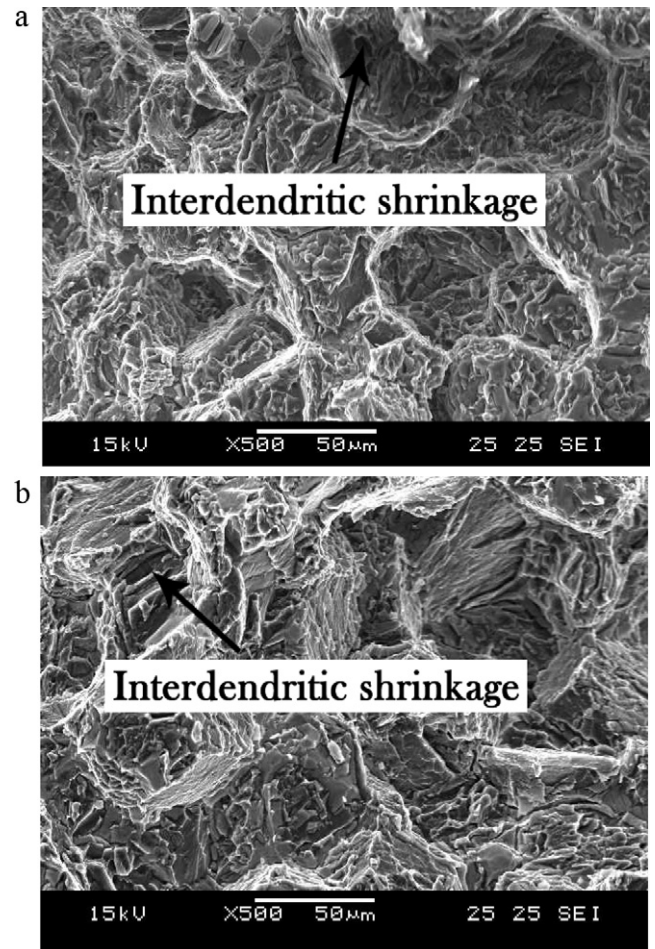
SEM fractograph of the fracture surface of a tensile test specimens showing (a) and (b) cleavage features.
